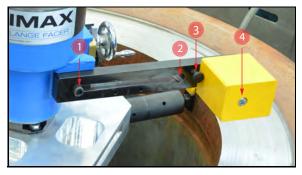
LOCATION OF LOCKING SCREWS
